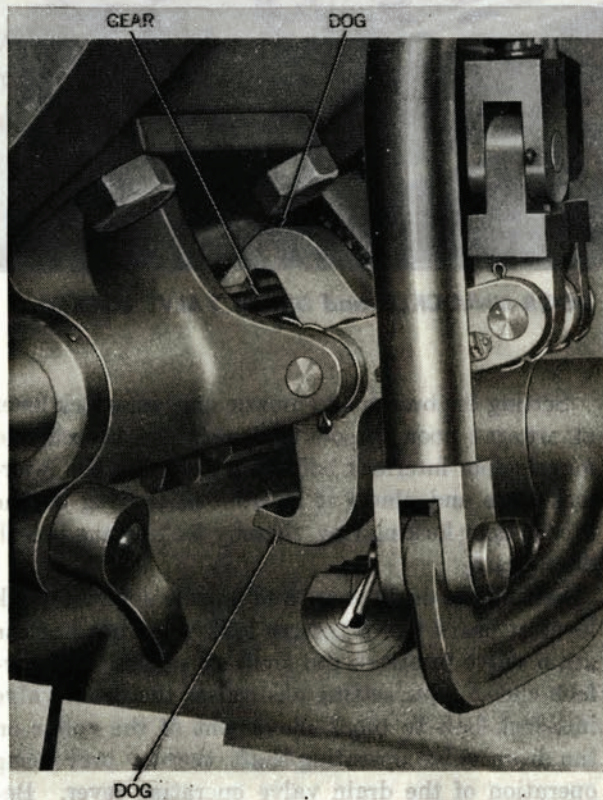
Hand Operating Shaft Interlock Dogs—TUBE READY TO FIRE.
